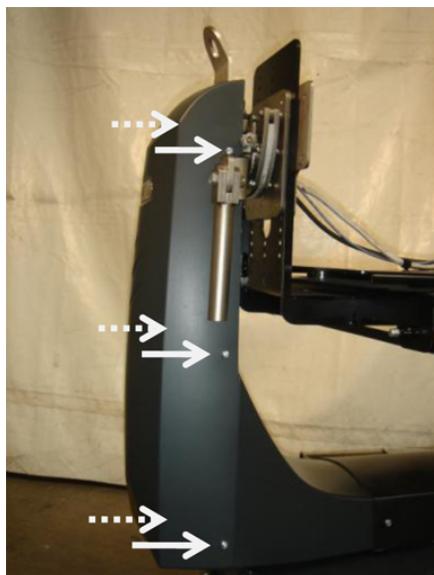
Remove Covers and Extract Cables through Tilt Mechanism
